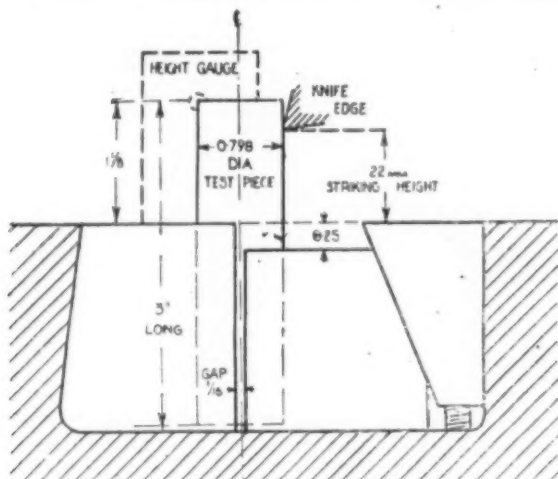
Arrangement of test-piece in Izod impact machine.
